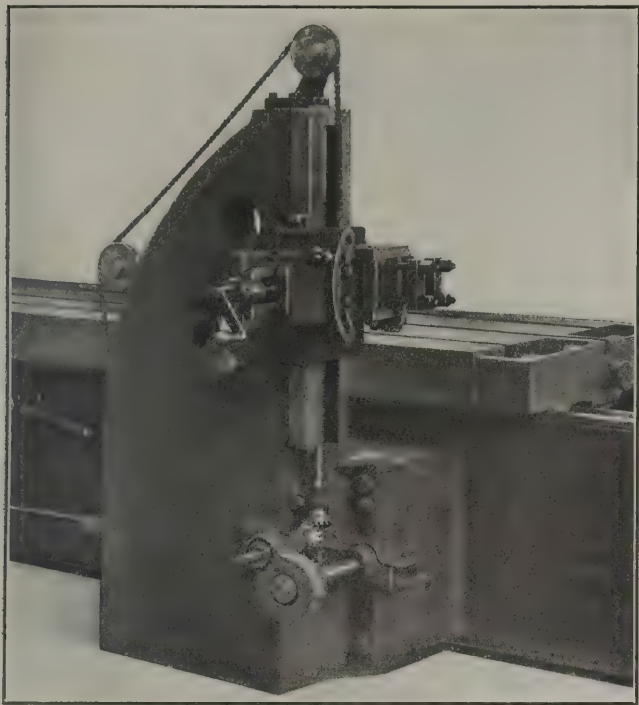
Auxiliary Housing of Planer shown in Fig. 1
